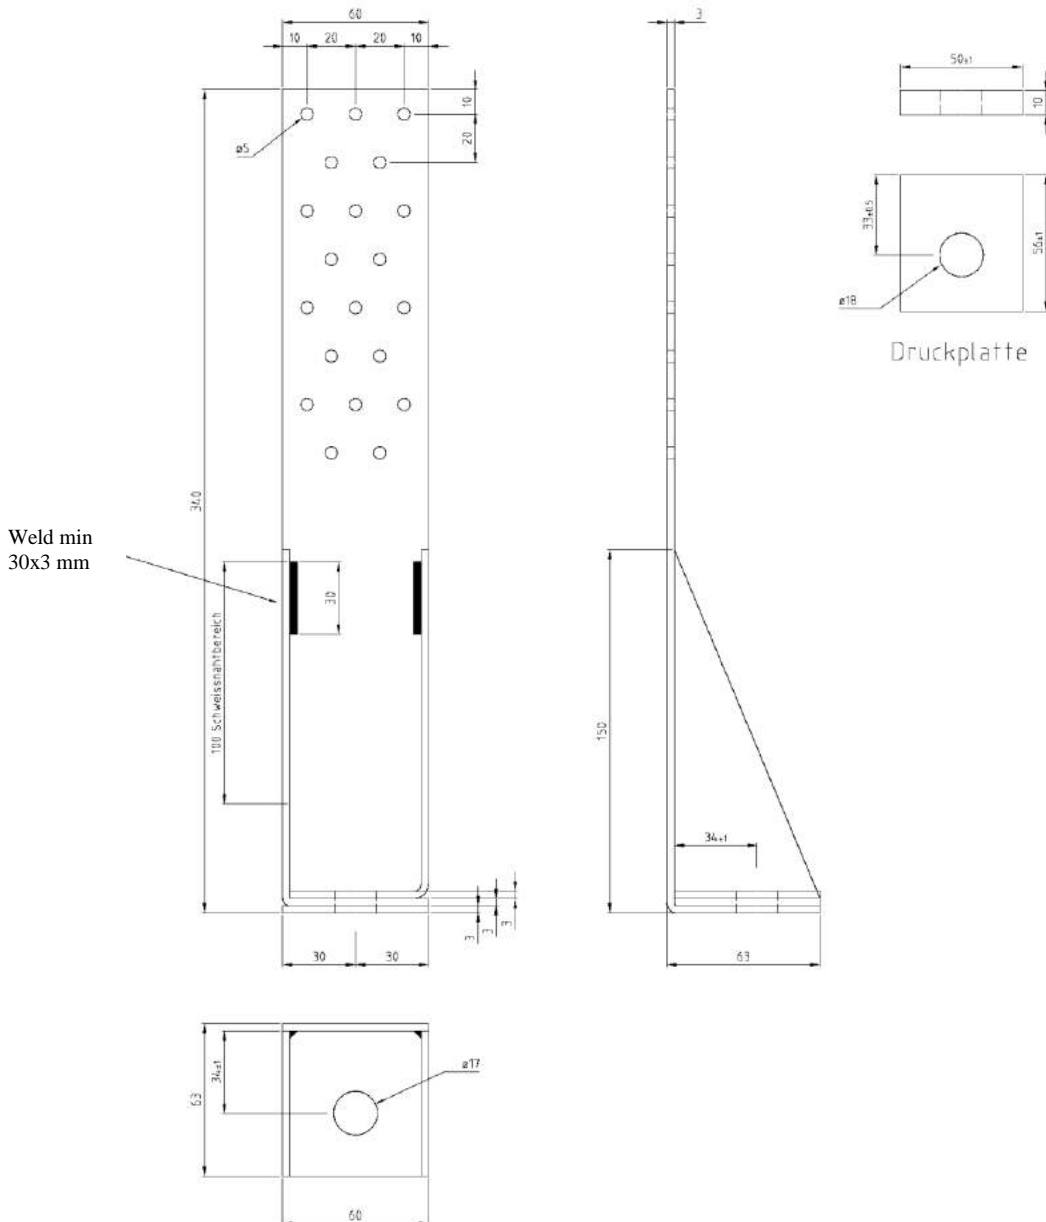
Dimensions of type WHT340 (drawing with washer 56x50x10)
